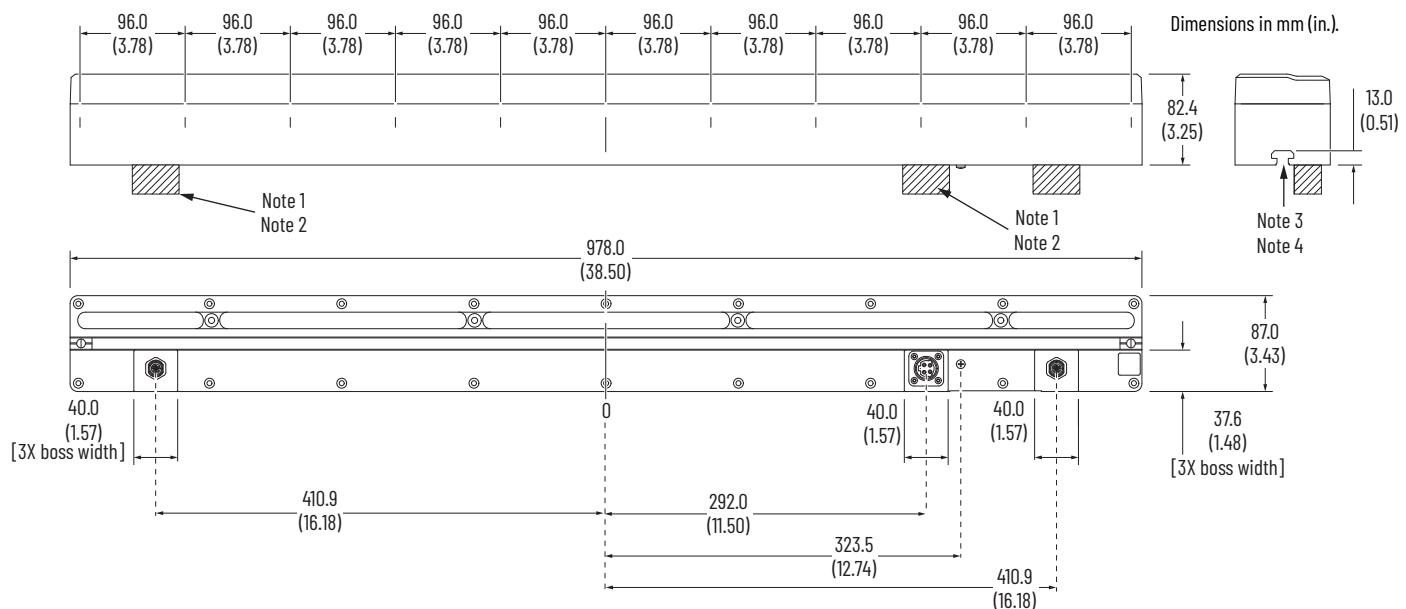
(MMI-QS-S10E05) Mechanical Drawing 0.5 Meter Motor
